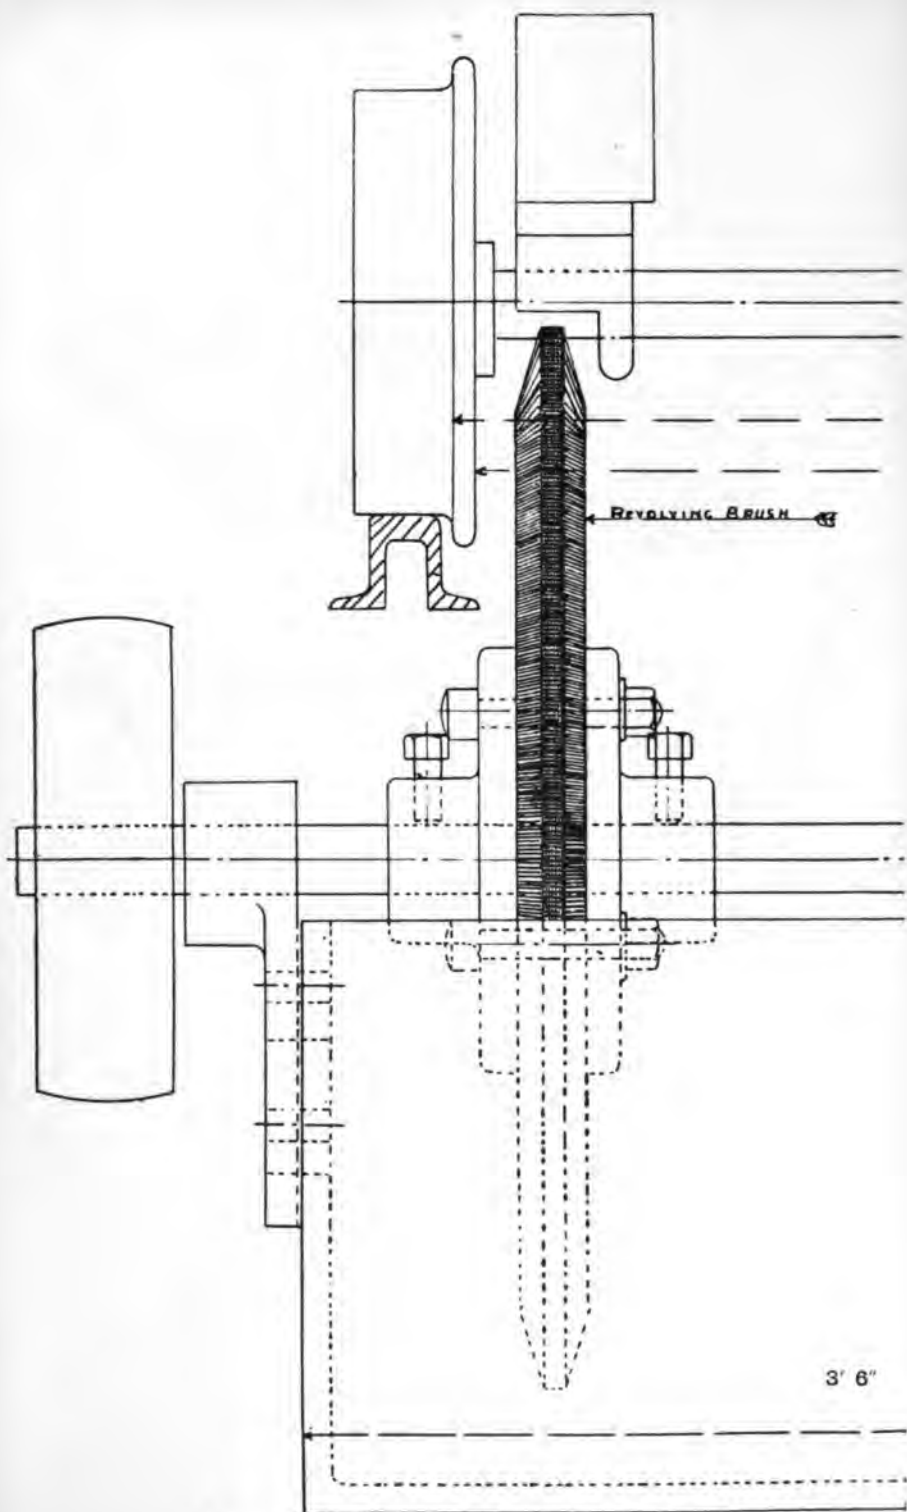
HALF ELEVATION OF DRIVEN TUB GREASER FOR PIT BANK.
